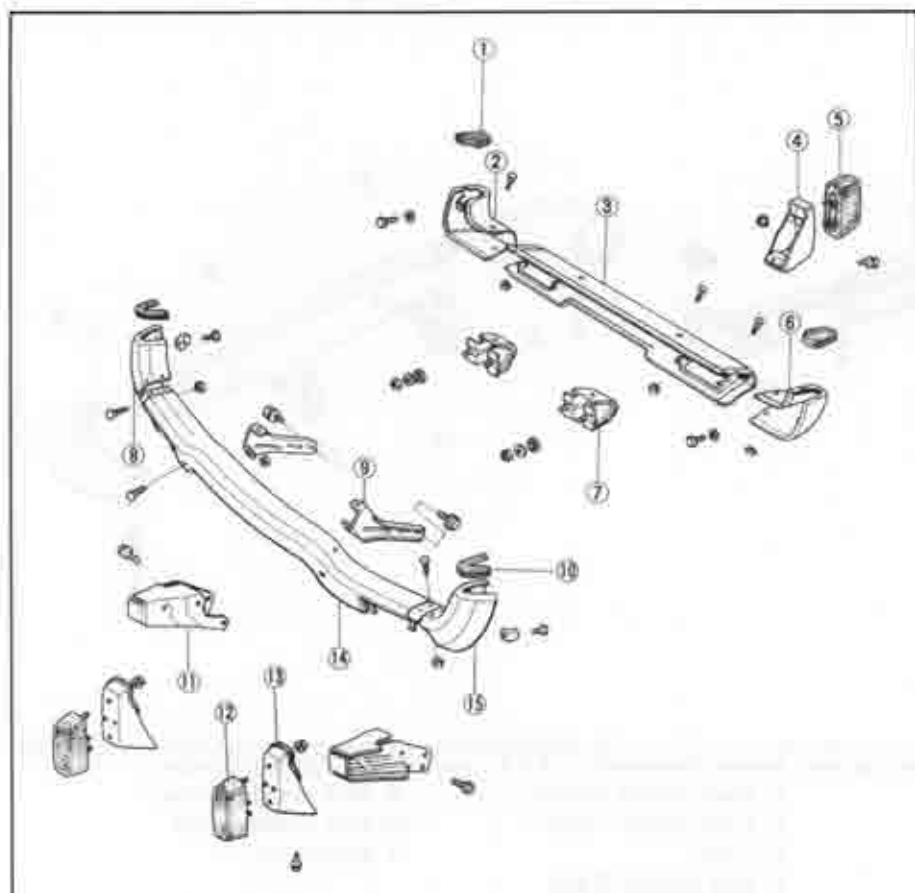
Bumper components - U.S.A. & Canada Vehicles (Hard Top)
